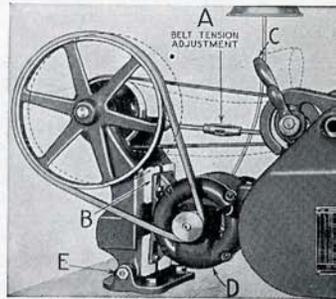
End View of Adjustable Horizontal Motor Drive Countershaft
